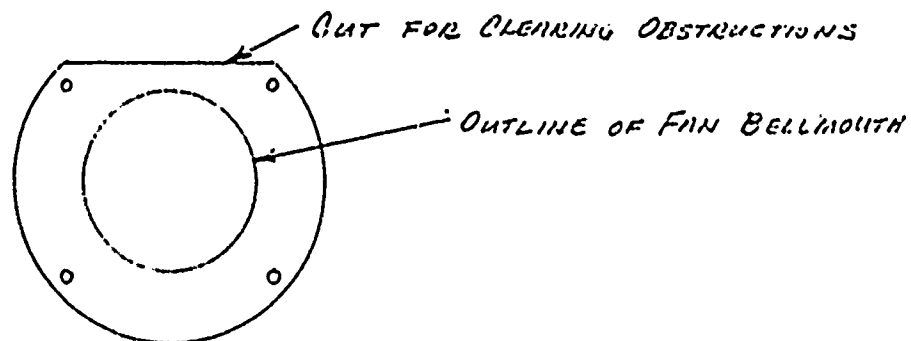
CROSS SECTIONS OF FORCED DRAFT BLOWER DUCT TREATMENT
